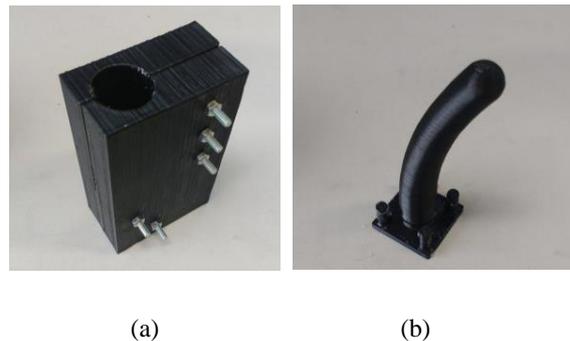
Printed molds for the Ecoflex curing: (a) Main mold; (b) Shaping mold
